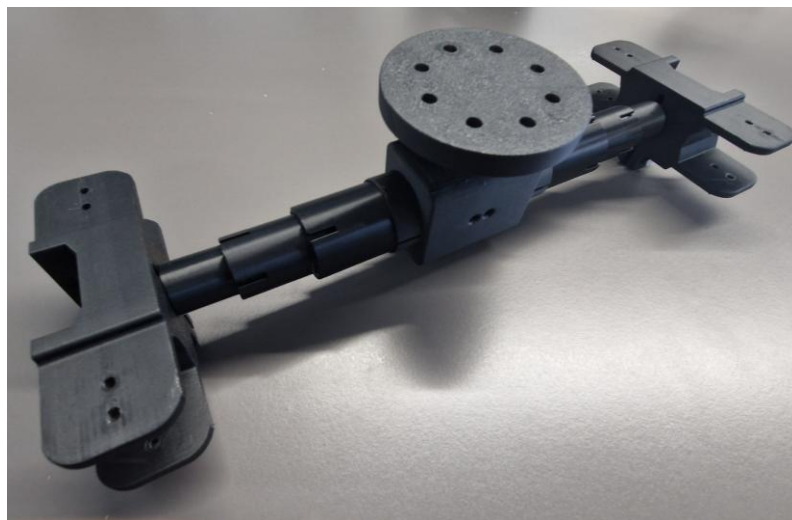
Gripper mount, internal telescopic structures, and telescopic structure couplers prototype assembly
